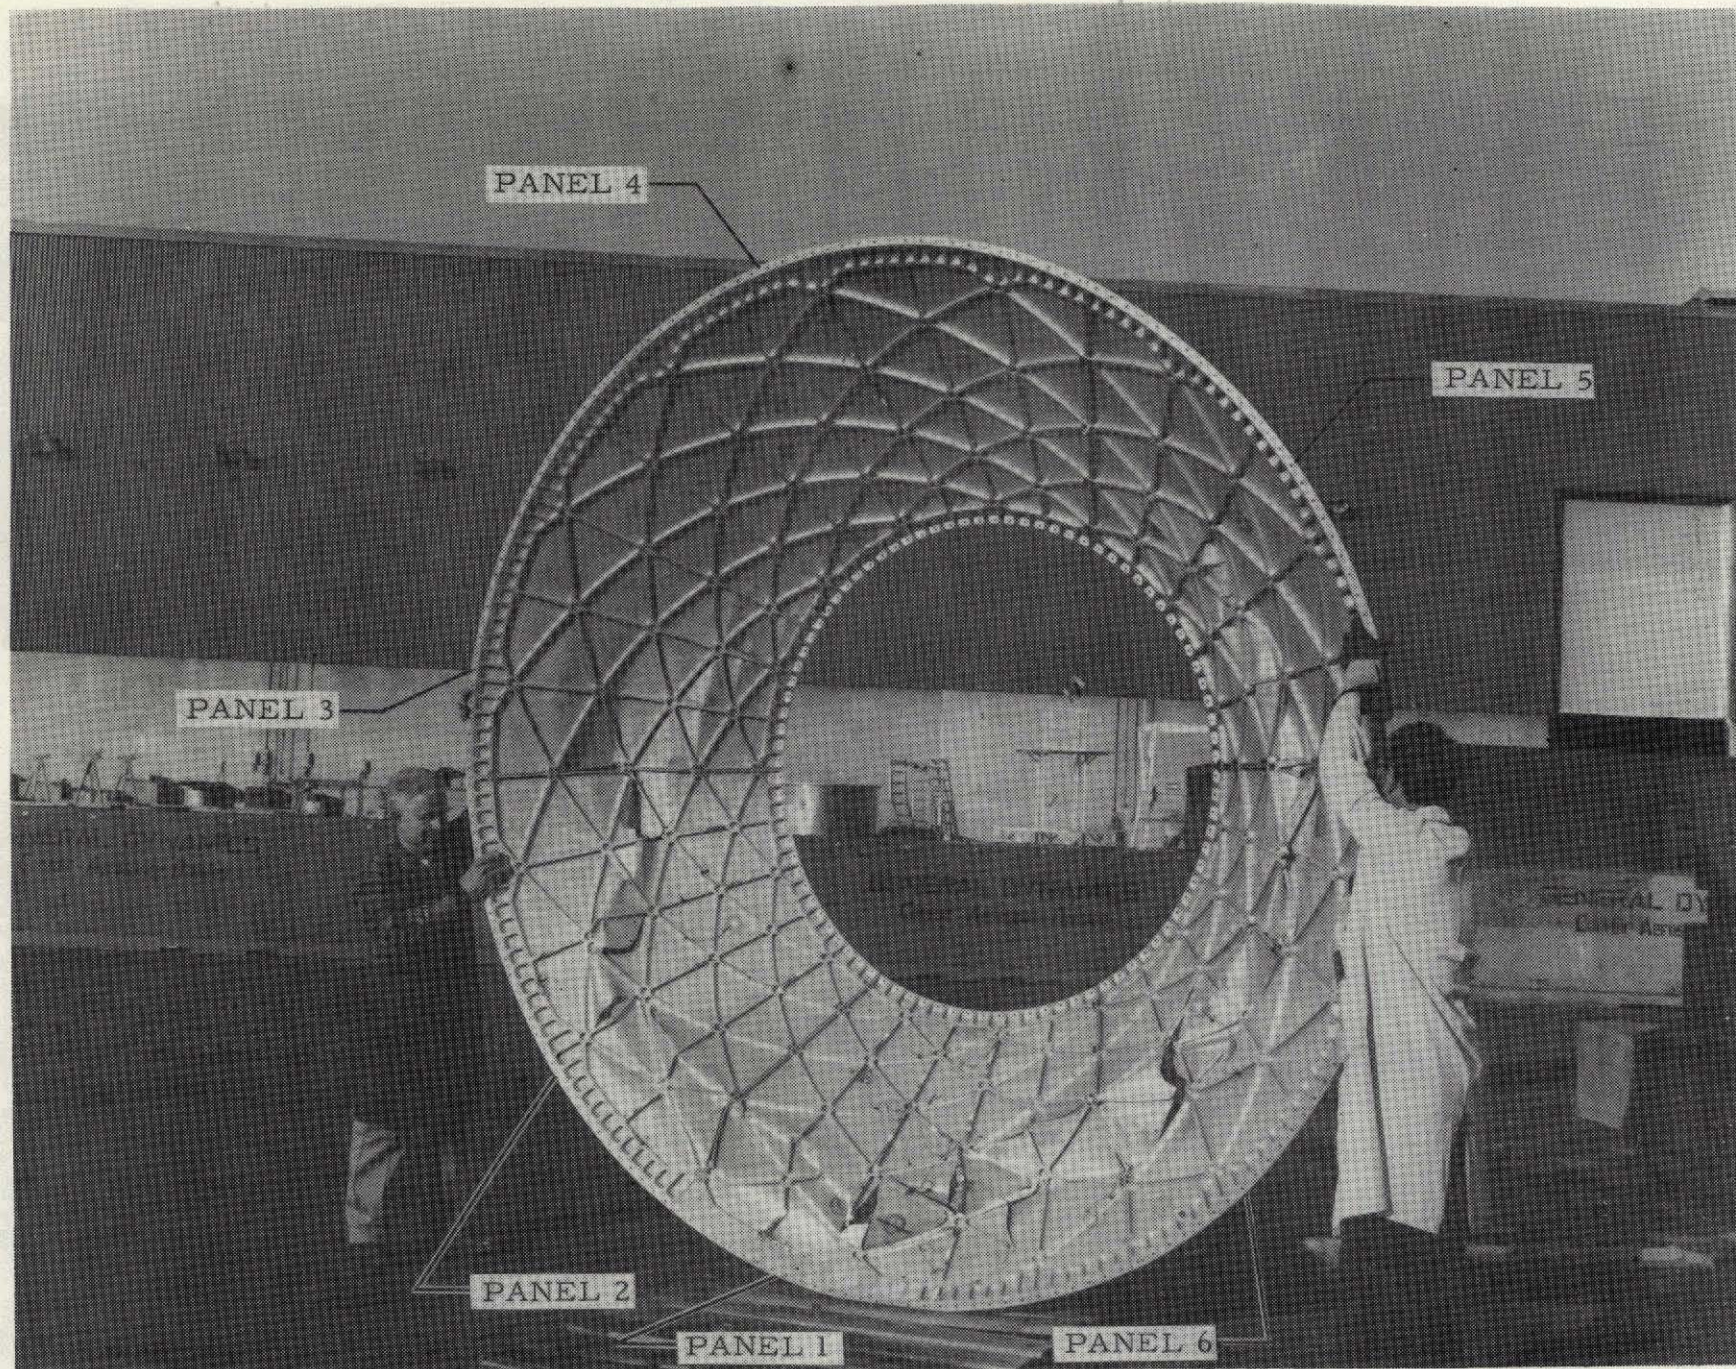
FAILED TEST SPECIMEN- INTERNAL VIEW
